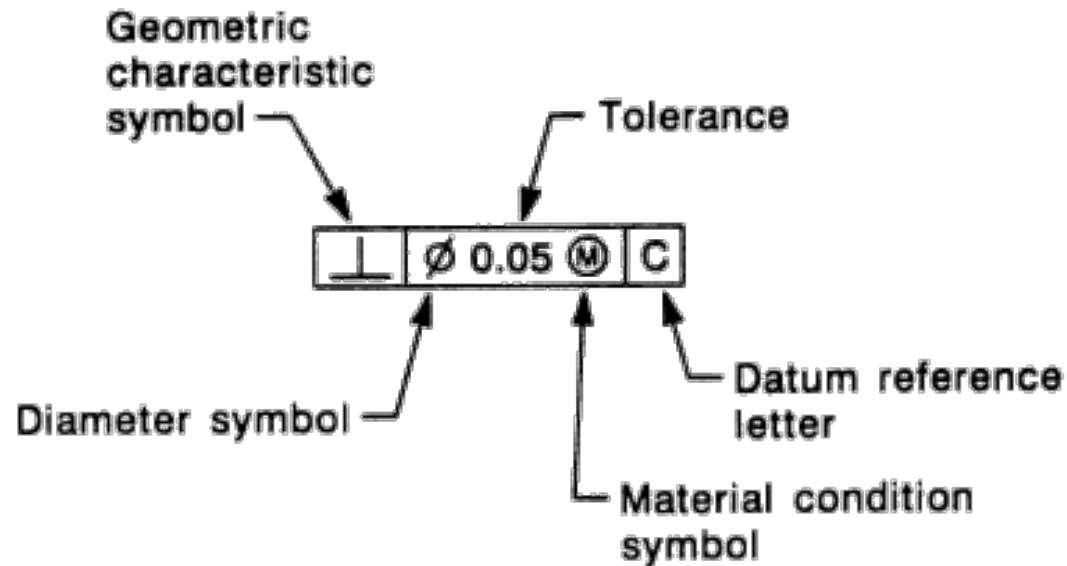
Whether a diameter symbol and material condition modifier are used, or omitted, depends on the desired tolerance specification and the type of feature being controlled.
